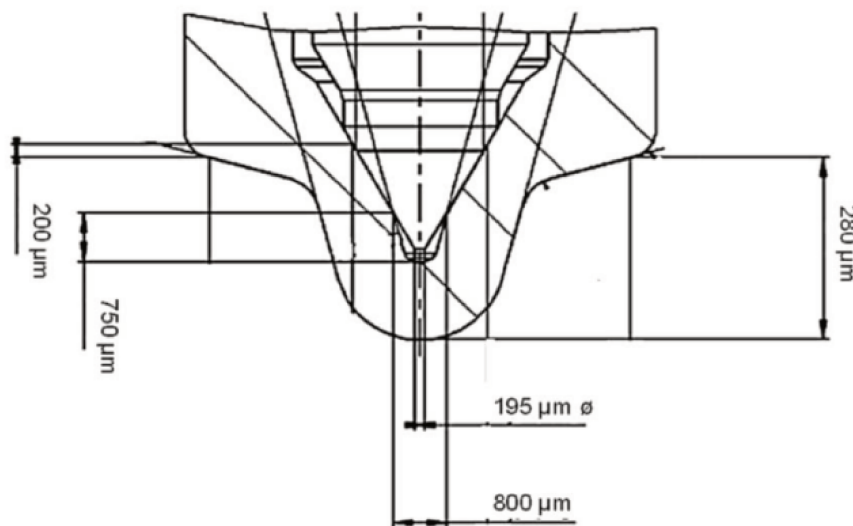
Schematic view of the diesel injector nozzle [6].
